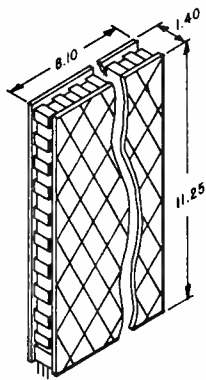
Universal-logic package of 460 micromodules in wire-wrapped mounting boards.
